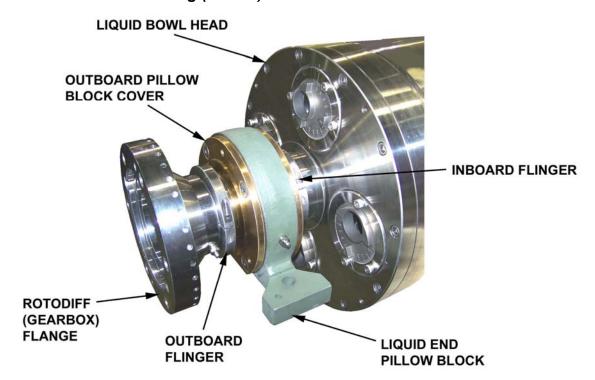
Liquid End Pillow Block and Bearing Components Location
